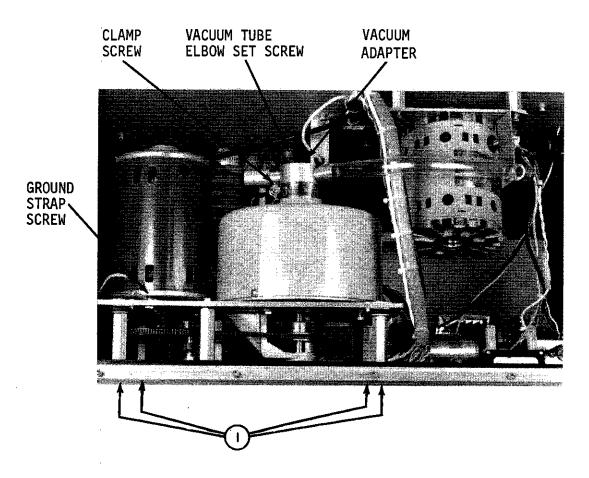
Removal of Vacuum Blower Motor Assembly
